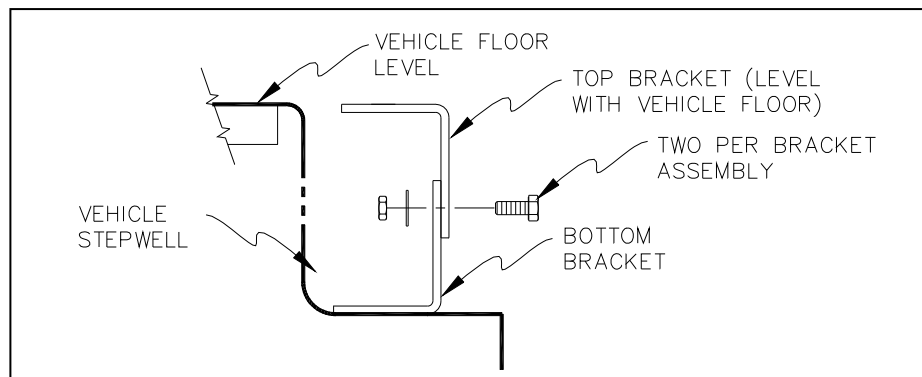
FORD VAN CLAMPING BAR ARRANGEMENT
